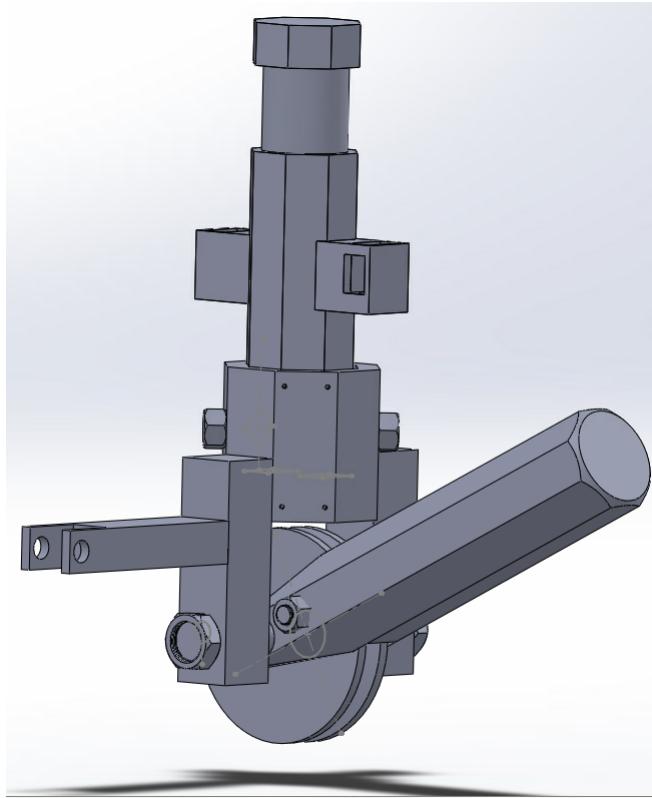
Shows the final 3D CAD print in solid works after initial testing to include its modifications.
